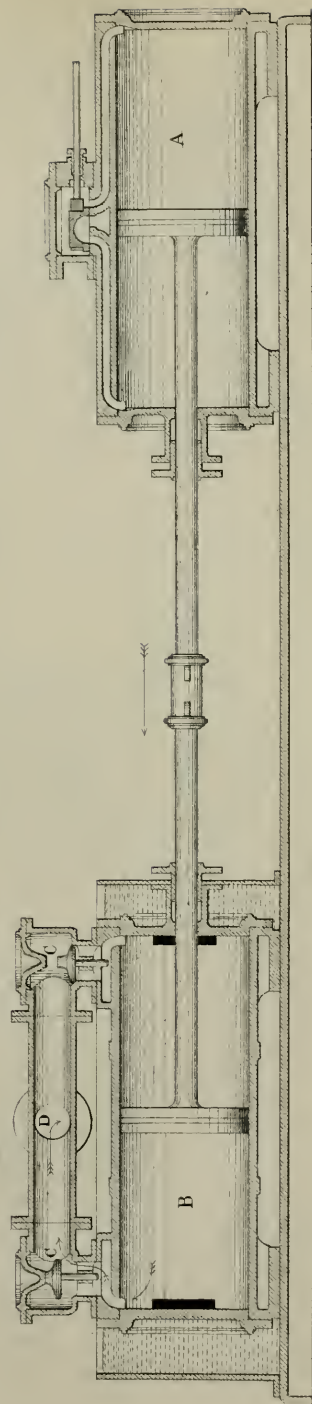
Longitudinal Section of Air - Compressing Engine.
